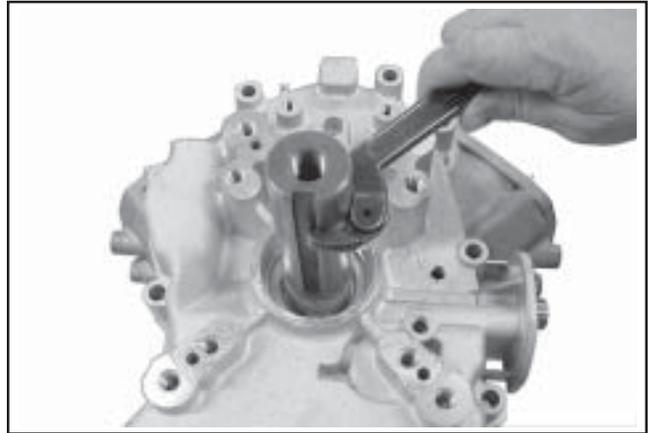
Rotating Crankshaft to Seat Closure Plate.
